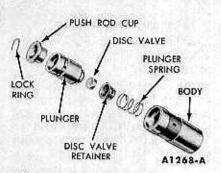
Typical Hydraulic Valve Lifter Assembly
